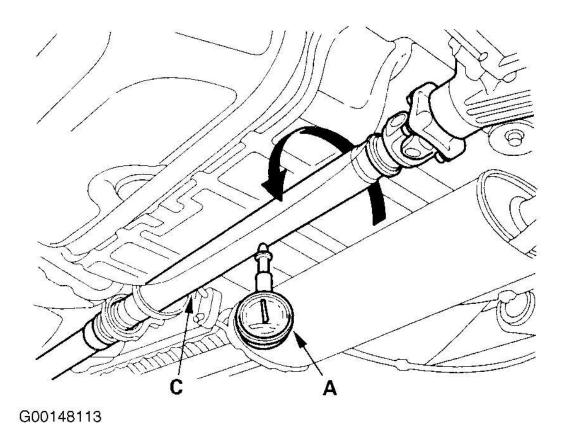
Identifying No. 2 Driveshaft Service Limit Courtesy of AMERICAN HONDA MOTOR CO., INC.
